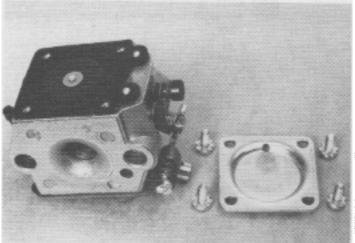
Assemble the metering gasket next to carburetor body. Assemble the diaphragm on the gasket. Be sure there are no wrinkles in the diaphragms.
